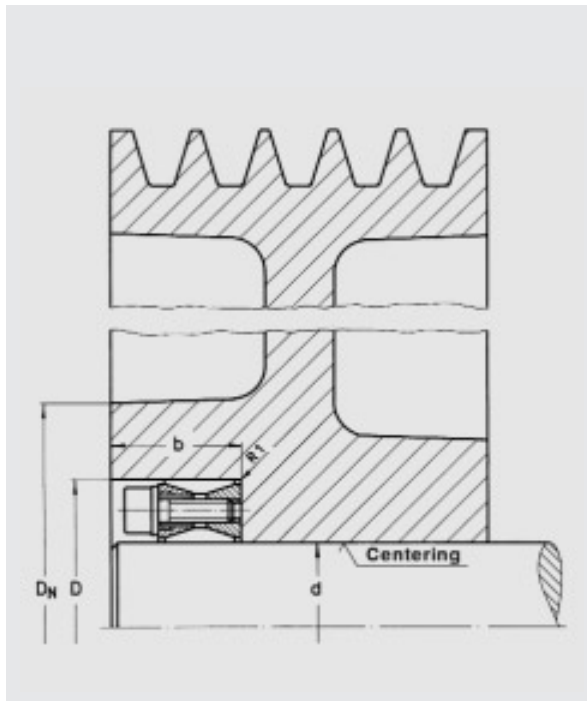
· Hub mounted with Locking Assembly RfN 7012
